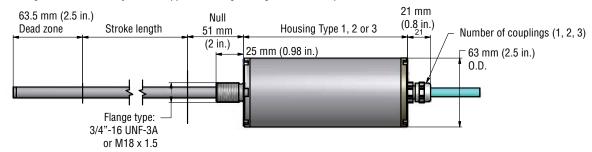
Model RS Rod-style sensor dimension reference. (See Figures 5, 6 and 7 for cable gland exits)
